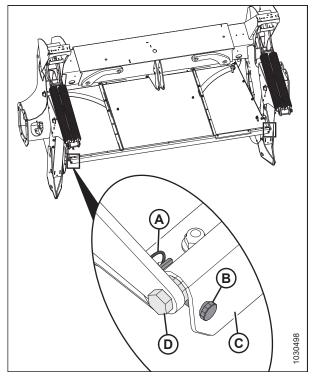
Forming Shield Secured to Front of Windrower Legs
